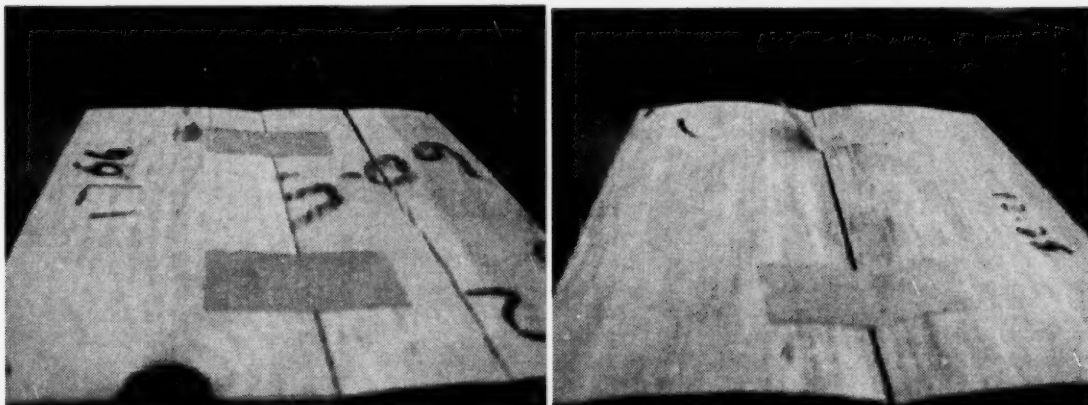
Failure types of composed veneers by taping in tensile test (L: wood failure; R: glueline failure).
